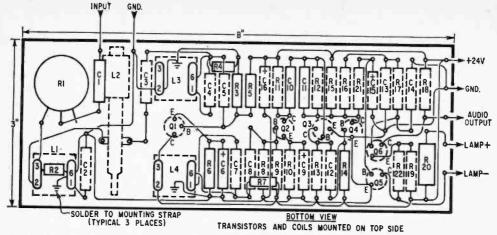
Detail layout of parts on circuit board. Dashed lines indicate parts under board.
